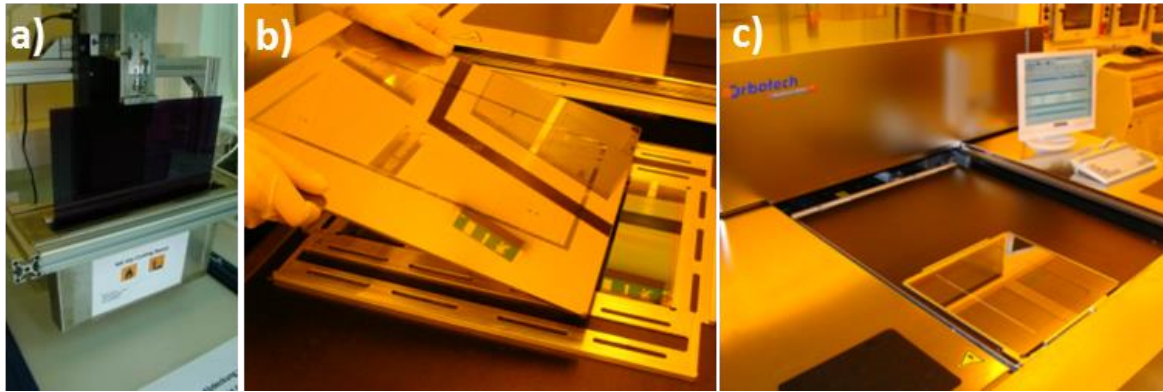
a) Dip-coating, b) positioning mount and c) mask exposure with LDI (Source: Fraunhofer IZM)
